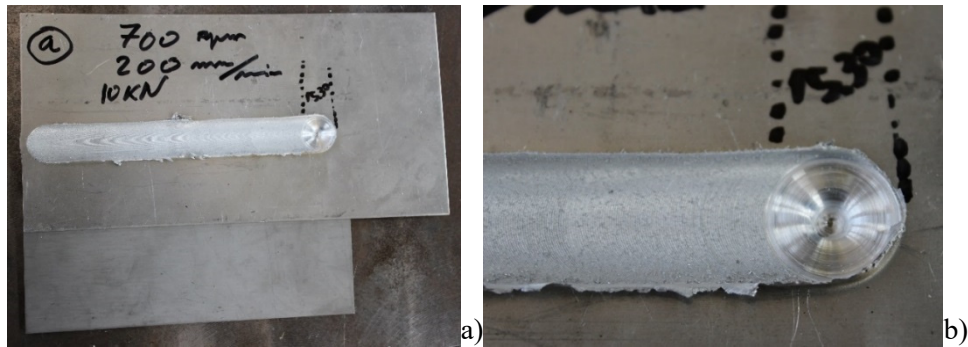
Lap joint aluminium-titanium (a) and a detail of the welded bead (b)
